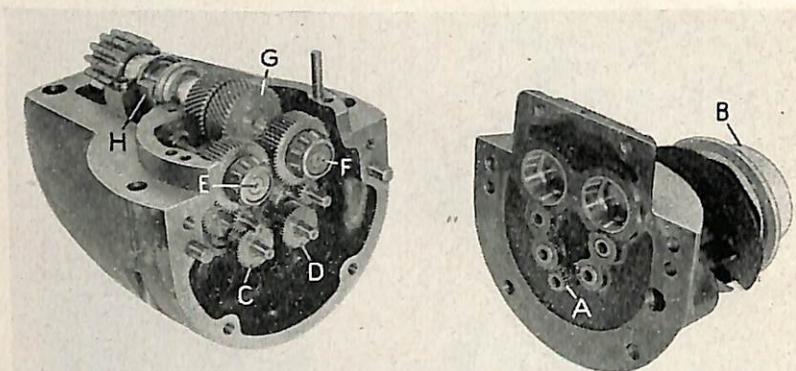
Servo-motor and Gearbox Unit, partially dismantled, which has been developed for Controlling the Spindle-quill Movement on the Machine shown in Fig. 10
